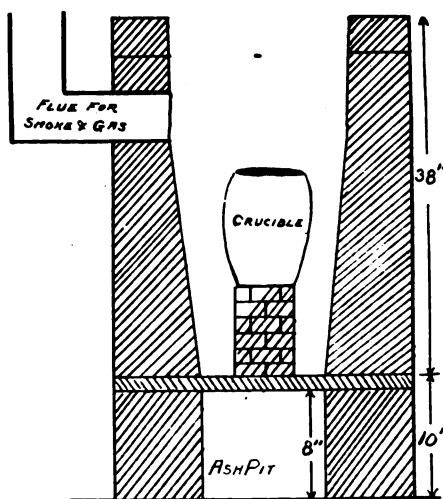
THIS IS A SECTIONAL VIEW OF FURNACE
